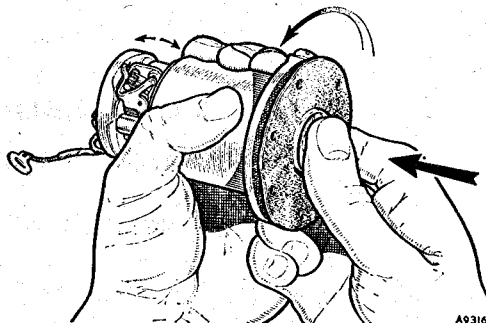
Setting the diaphragm. Unscrew until the rocker just 'throws over'
